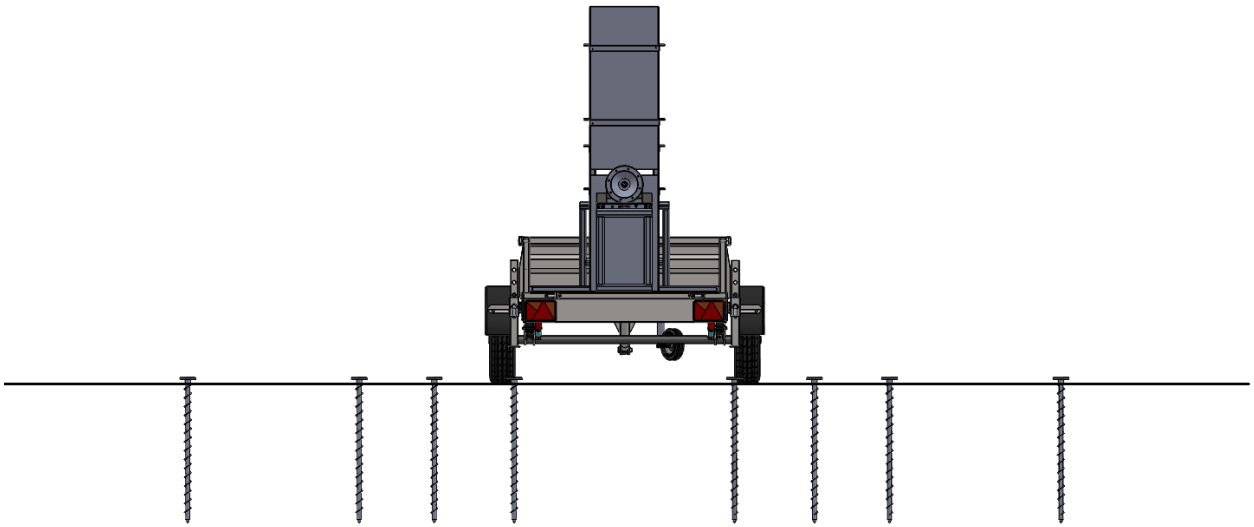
Test stand structure with ground anchor positioning BACK VIEW
